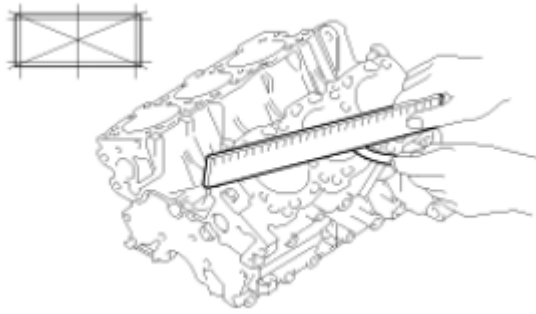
Measuring Surface Contacting Cylinder Head Gasket For Warpage
